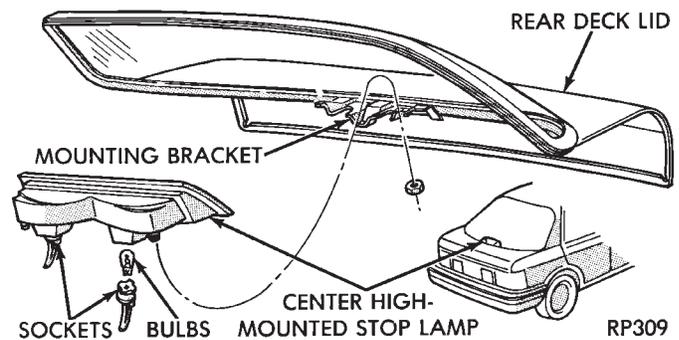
Center High Mounted Stop Lamp AP/24-44-Body
